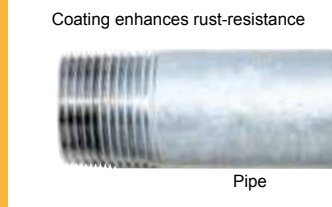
Thread is left with a layer of pipe coating (20-30 μm).
